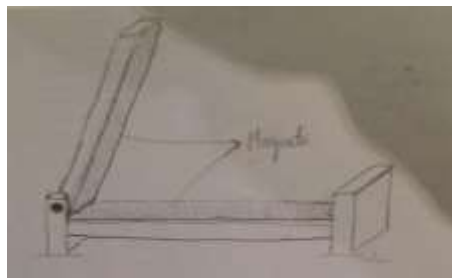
Flip-up clamp with magnets to hold it closed on the foil.
